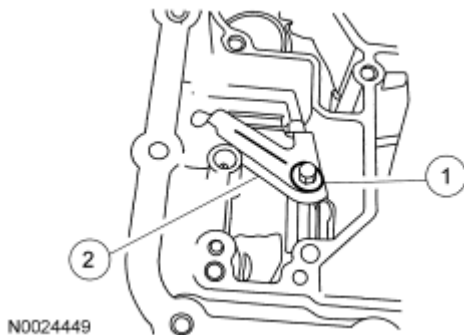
Thermostatic Fluid Level Control Valve Bracket & Bolt
